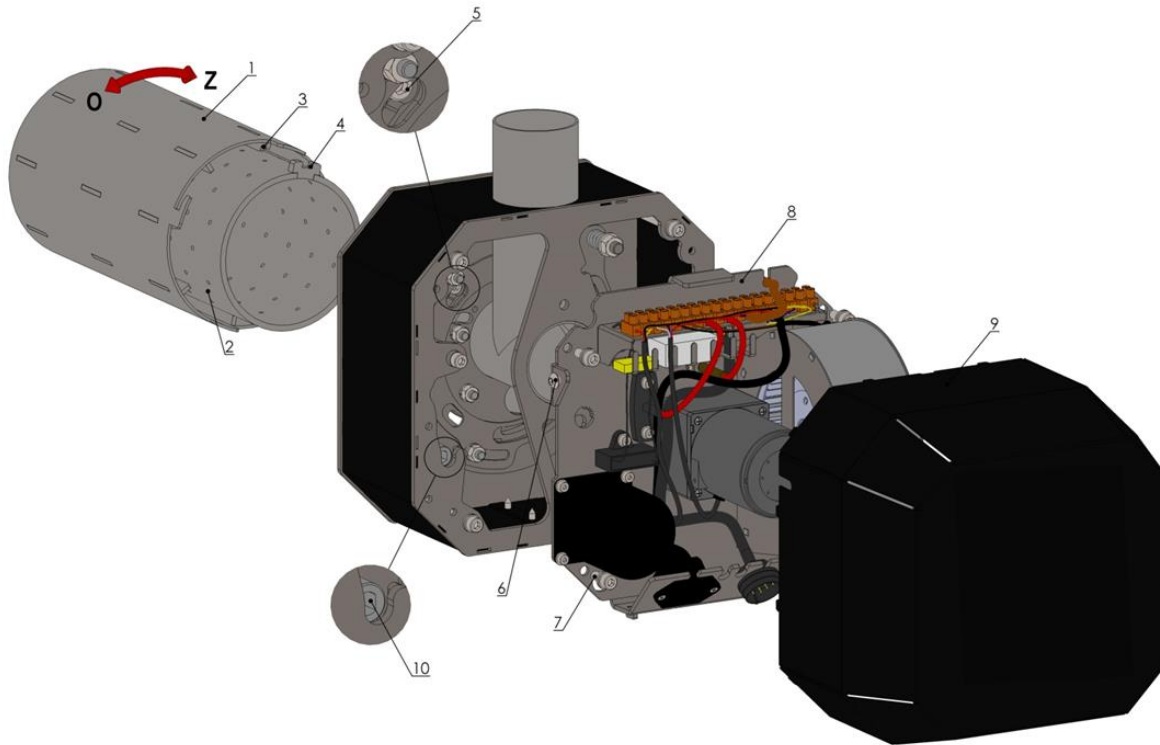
Cleaning of the tubular aeration rotary chamber – view 1
